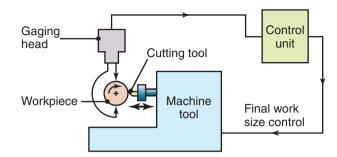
In-process inspection of a workpiece diameter in a turning operation. The system automatically adjusts the radial position of the cutting tool in order to produce the correct diameter.
